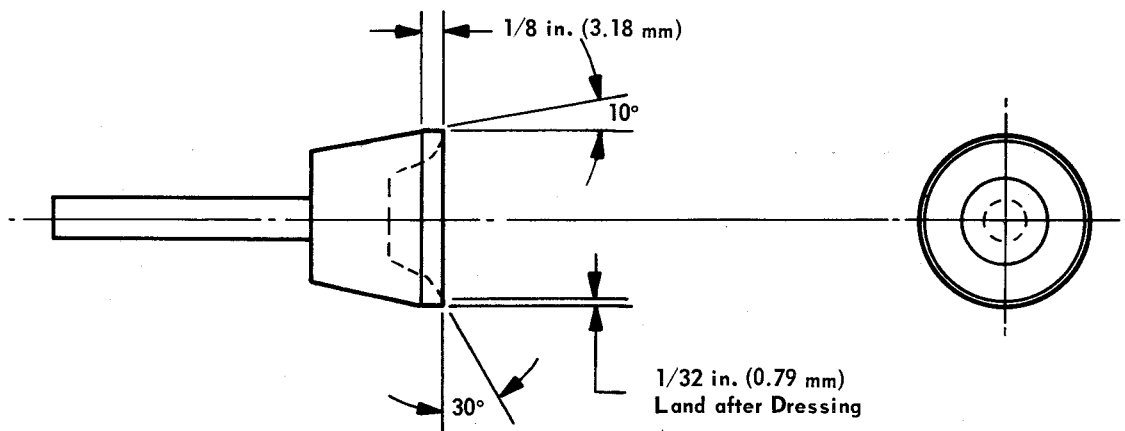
Sketch of modified standard 49-CG-J5-VCPT grinding wheel shape showing land width.
